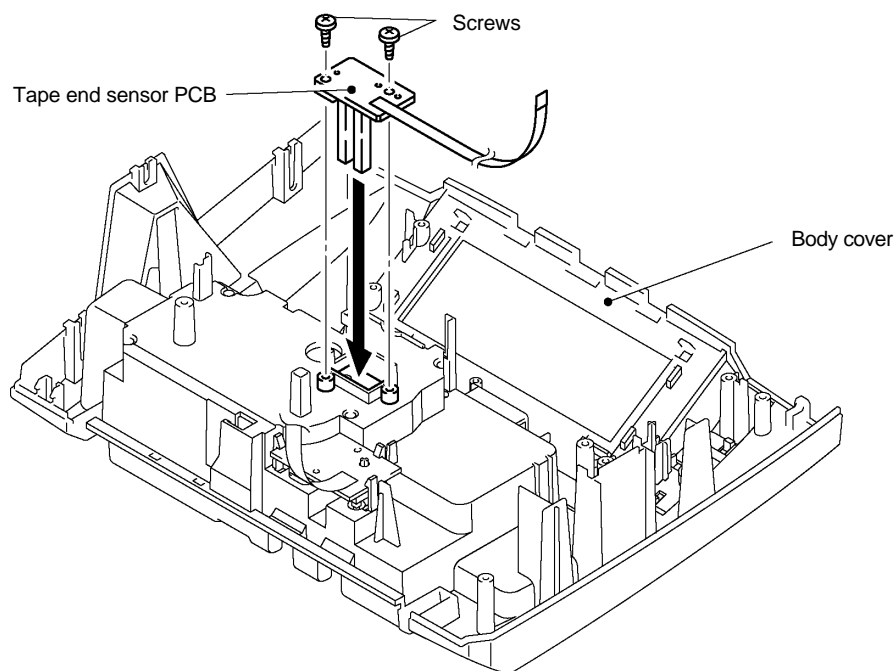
Reassembling the Tape End Sensor PCB
